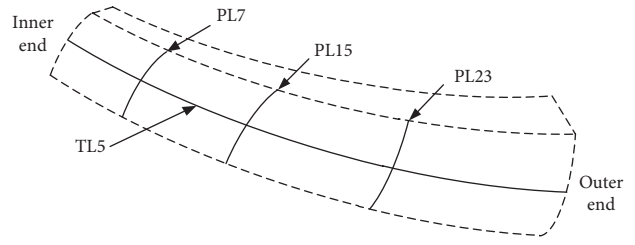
The theoretical points of the tooth surface of the spiral bevel gear.
